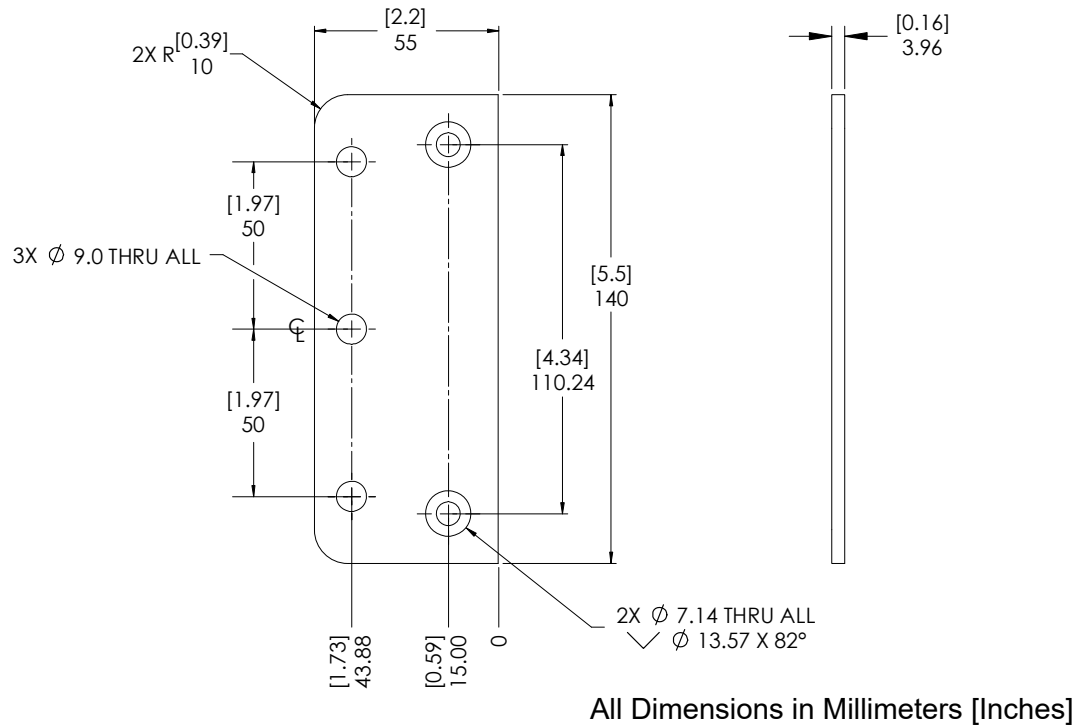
NC-12 Mounting Plate Mechanical Drawing
